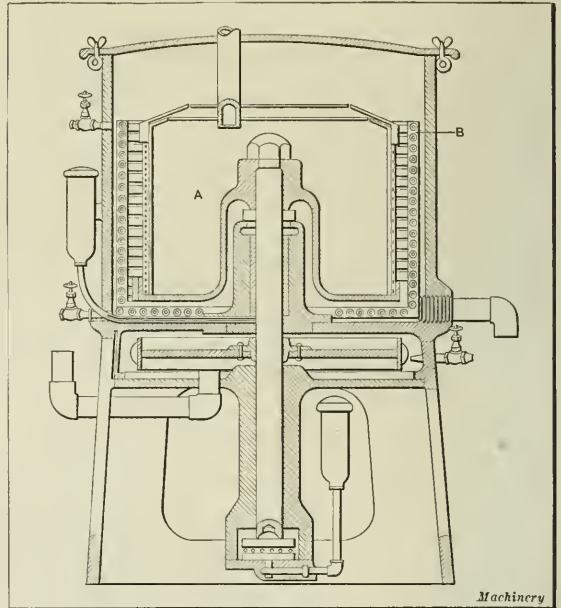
Oil & Waste Saving Machine Co.'s Turbine-driven Centrifugal Filter and Drier for purifying Oil recovered from Chip Separator
